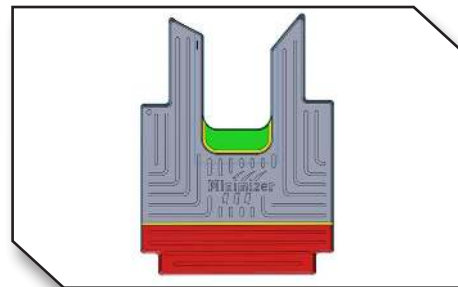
Center Mat Trimmed for Set Back Gearshift
